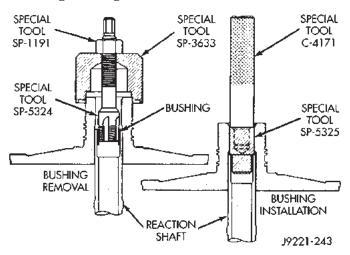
Replacing Reaction Shaft Support Bushing ASSEMBLY
